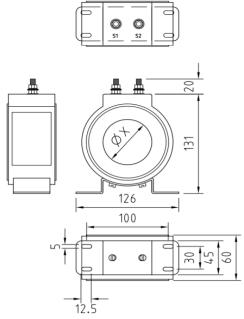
EL500/60 Toroid (101649) Dimensions
